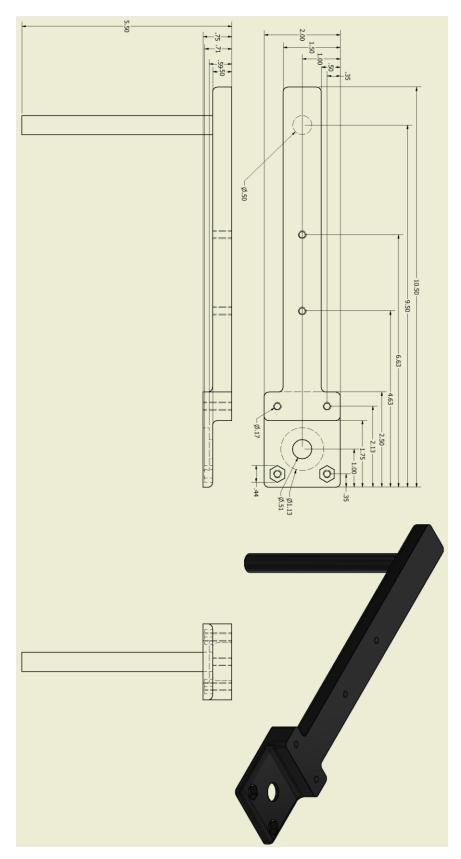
Arm Segment 1 Upper Half Mechanical Drawing (Units: in)
